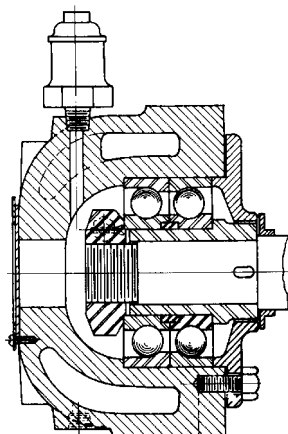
A double-row, angular-contact ball thrust bearing that is grease-lubricated and water-cooled
